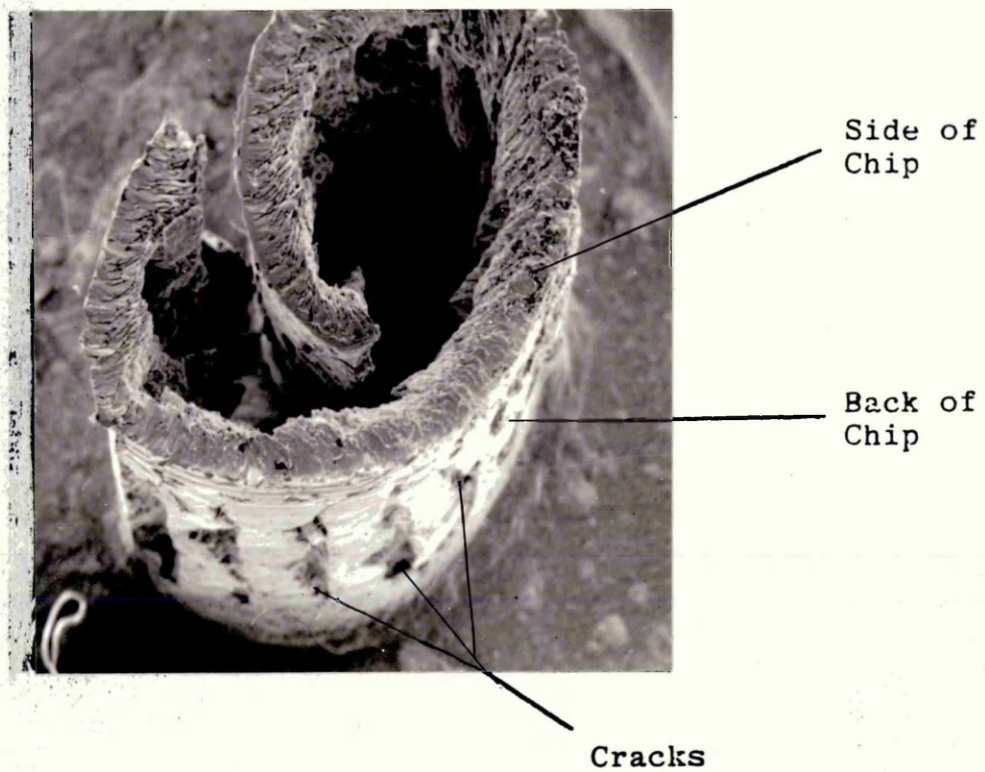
SEM photograph of a chip cut by a single 4 TPI hacksaw tooth at 95 mm/min. 50 mm wide mild steel workpiece.
